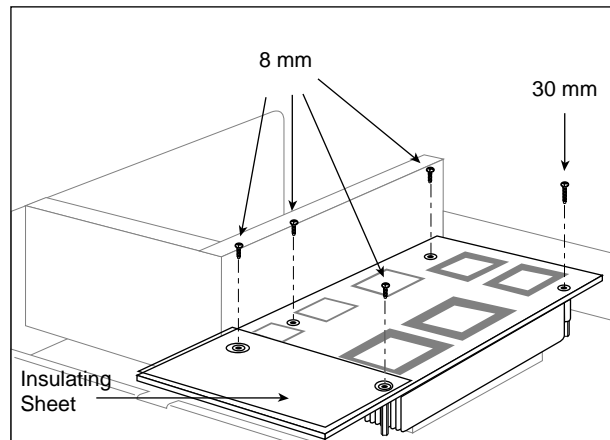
Installing the R8000 CPU Module Screws and Insulating Sheet
